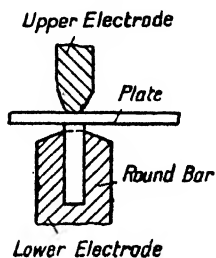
Electrodes for spot welding for the welding of stud-shaped articles
